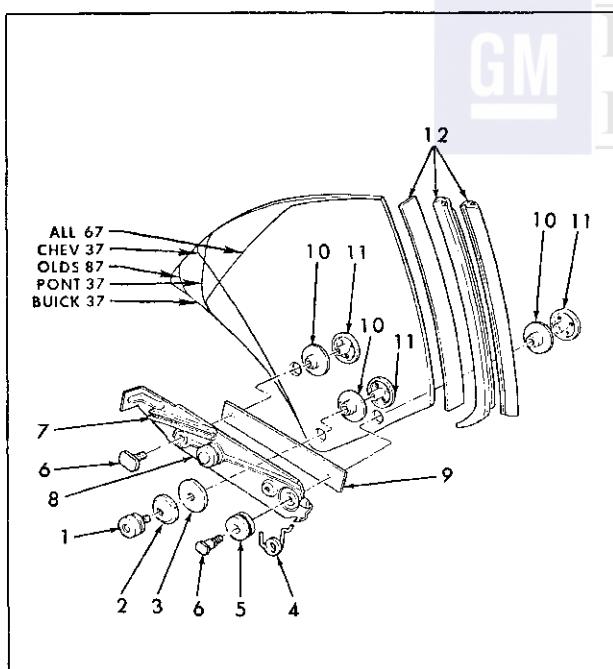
Rear Quarter Window Assembly "A - 37, 67, 87" Body Styles
